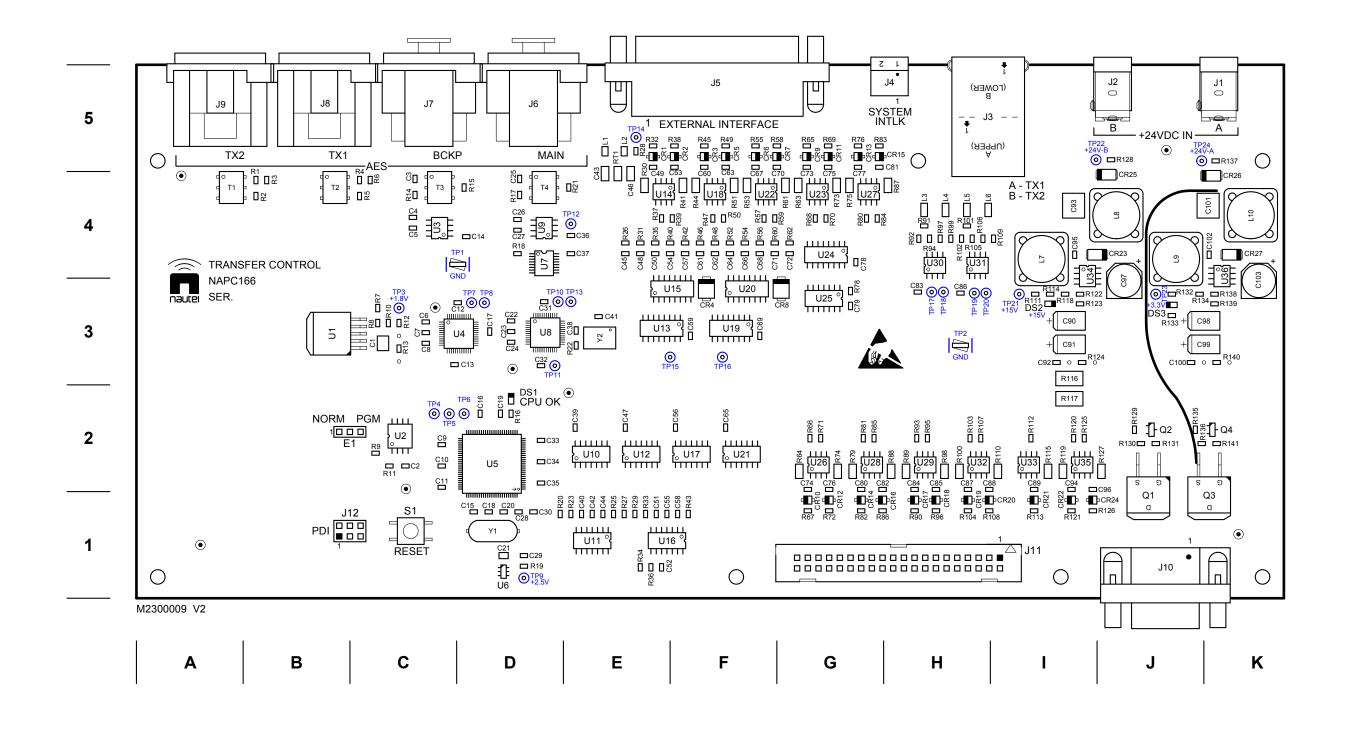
Assembly Detail - NAPC166 Transfer Control PWB
